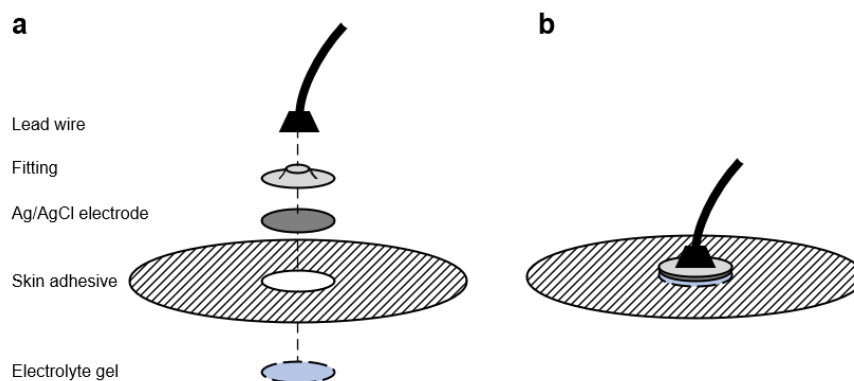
Schematic illustration of an ECG sensor with center fitting design in exploded view (a) and assembled (b).
